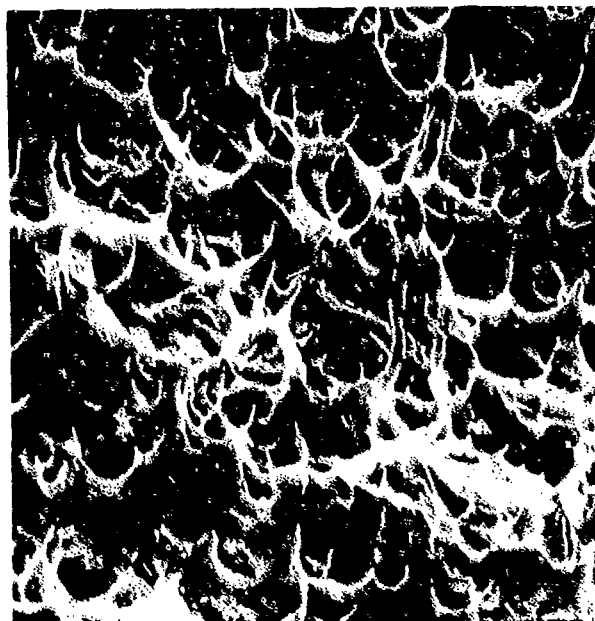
Elongated dimples on tensile fracture surface of AX-110 weldment, 4600x.
